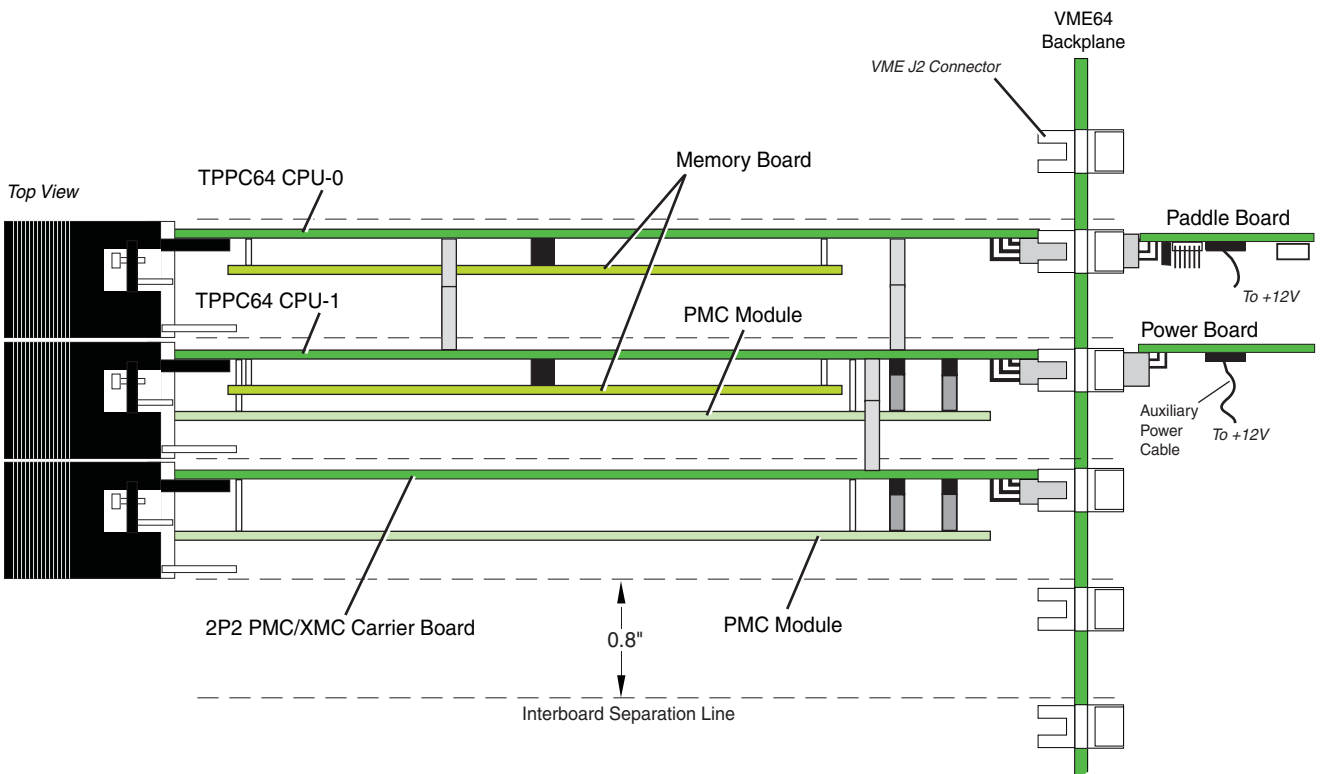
TPPC64 CPU-0, CPU-1, Carrier Board, and Paddle/Power Boards
